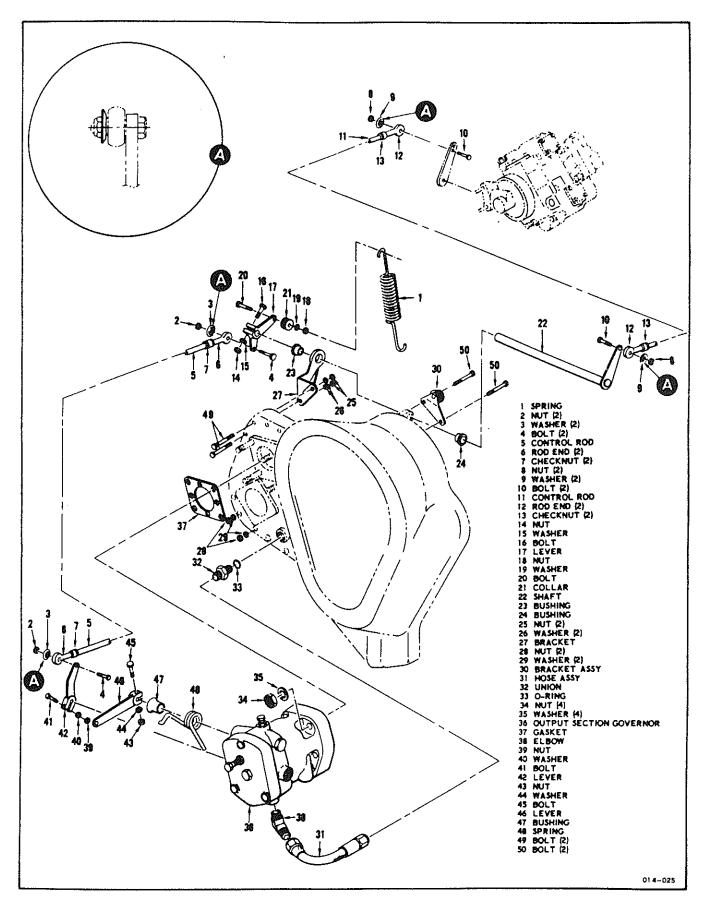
Output Section Governor and Control Linkage Installation, Exploded View
